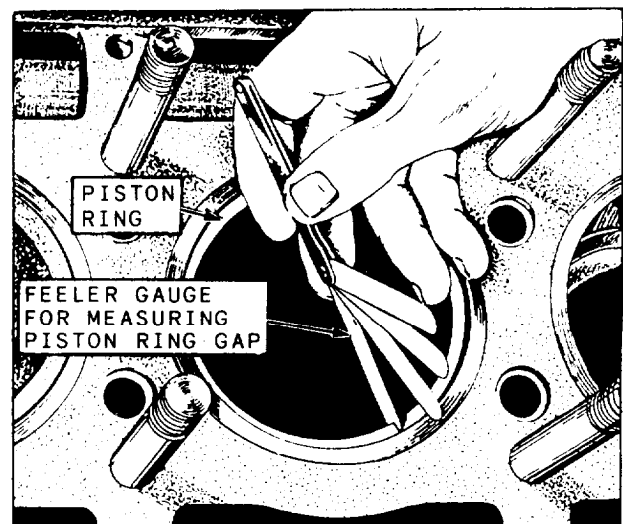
Measuring ring gap clearance in cylinder bore.
